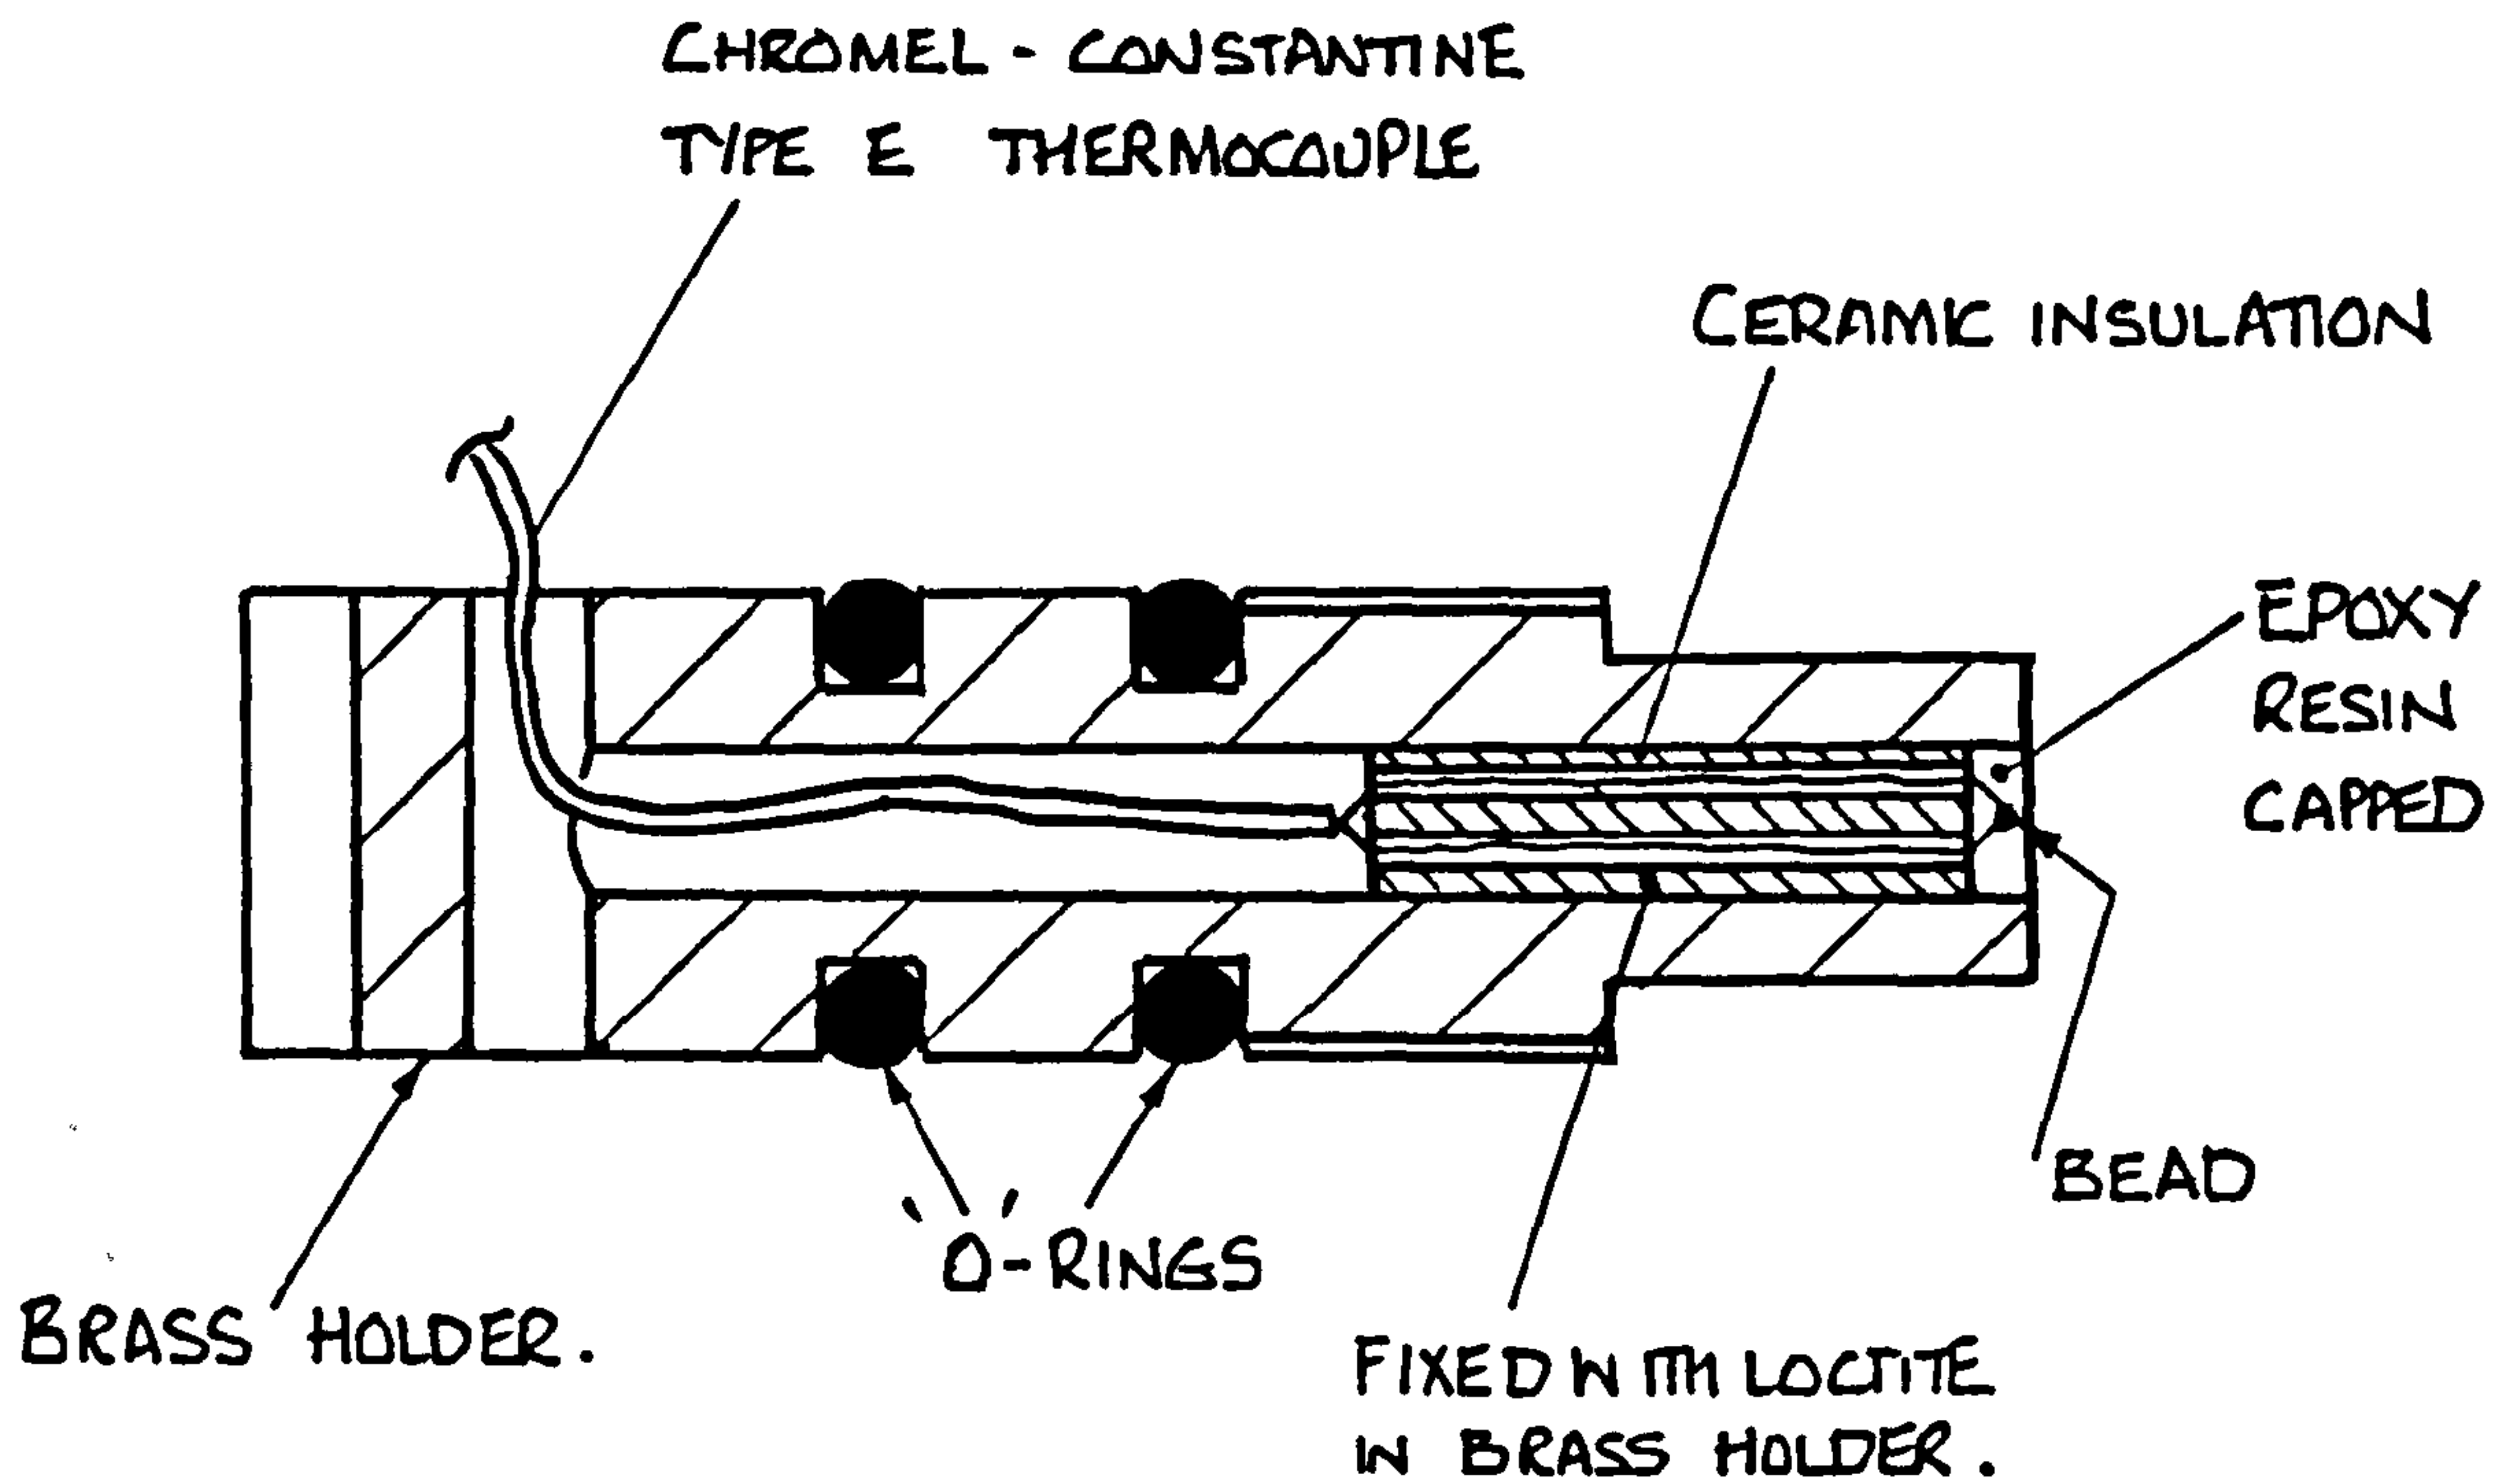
THERMOCOUPLE MOUNTING TECHNIQUE
